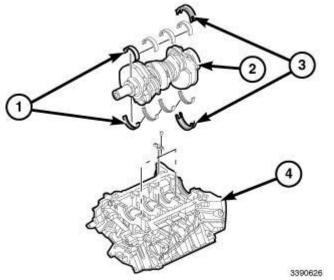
Crankshaft, Bearings, Thrust Bearing & Engine Block Courtesy of CHRYSLER GROUP, LLC
